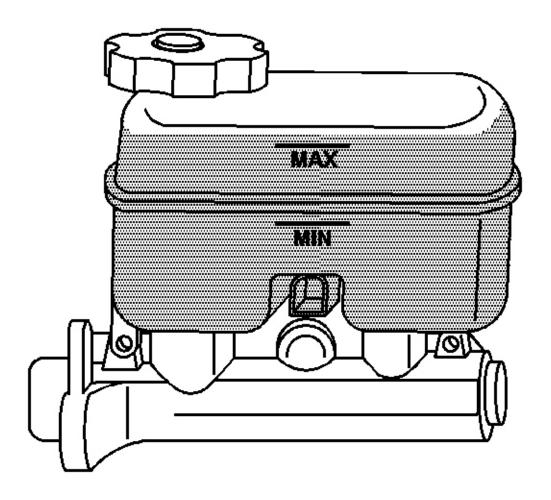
View Of Full Master Cylinder Reservoir MAX And MIN Marks Courtesy of GENERAL MOTORS CORP.
